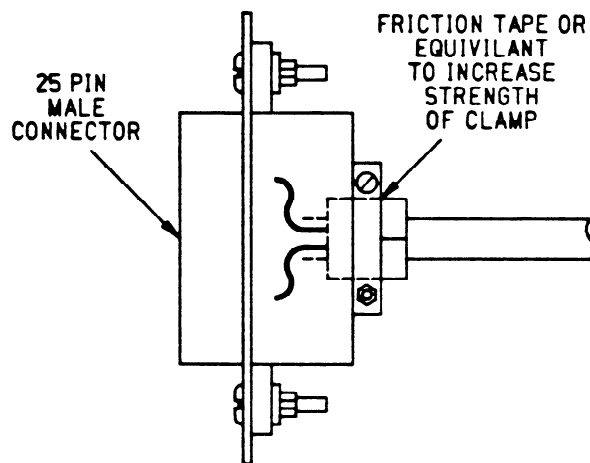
ASSEMBLY OF MATING CONNECTOR
